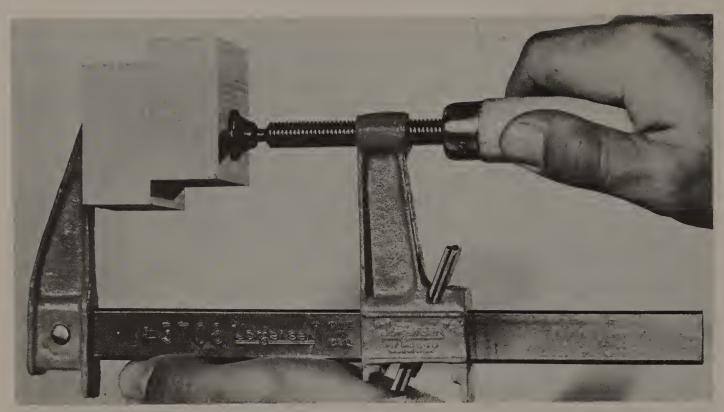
A bar clamp with a movable head and stationary tailpiece.
